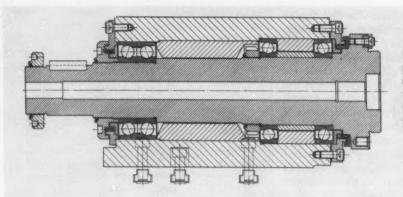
Spindle used for precision boring. The bearings are preloaded to provide sufficient rigidity under heavy loads and yet not overheat when the machine is operated at high speeds.
